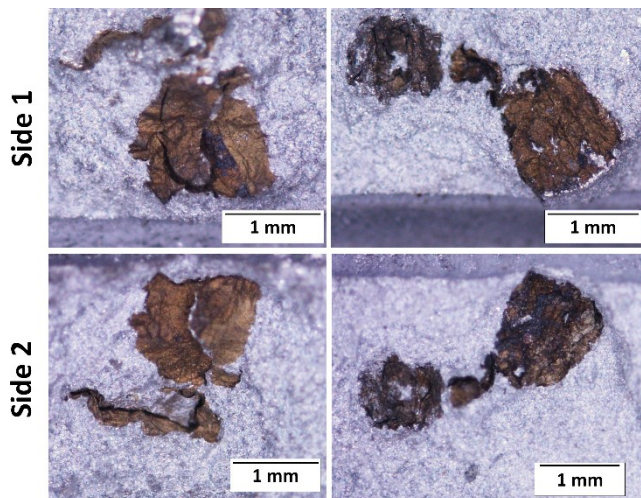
Two sides of the same bifilm inclusions on the fracture surface of K-mold samples
